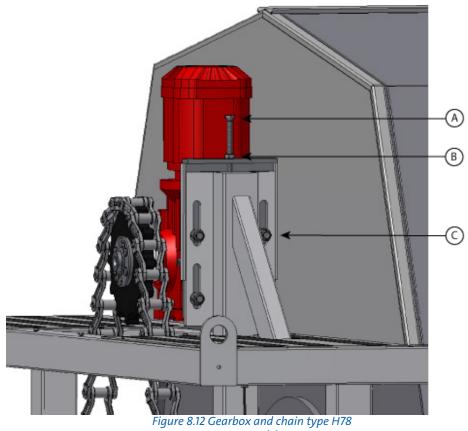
Gearbox and chain type H78 A. Nuts (4) B. Lock nut (1) C. Adjustment screw (1)
